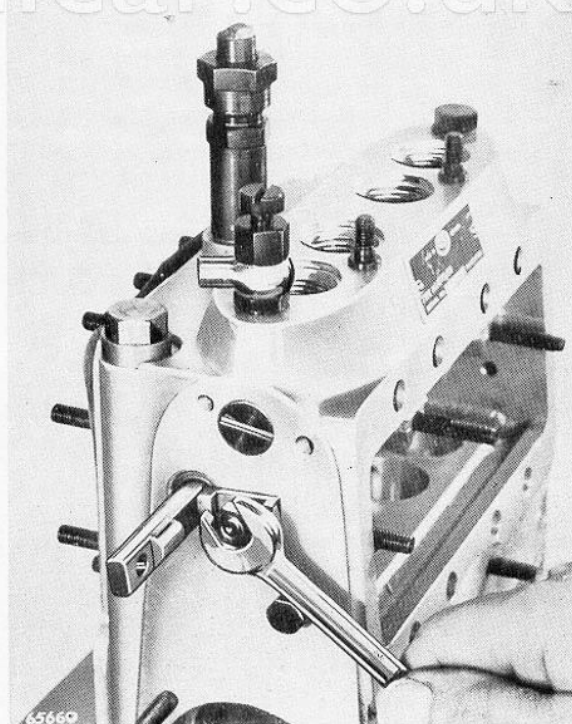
REMOVING THE CONTROL ROD LOCATING PLATE—TYPICAL ILLUSTRATION
